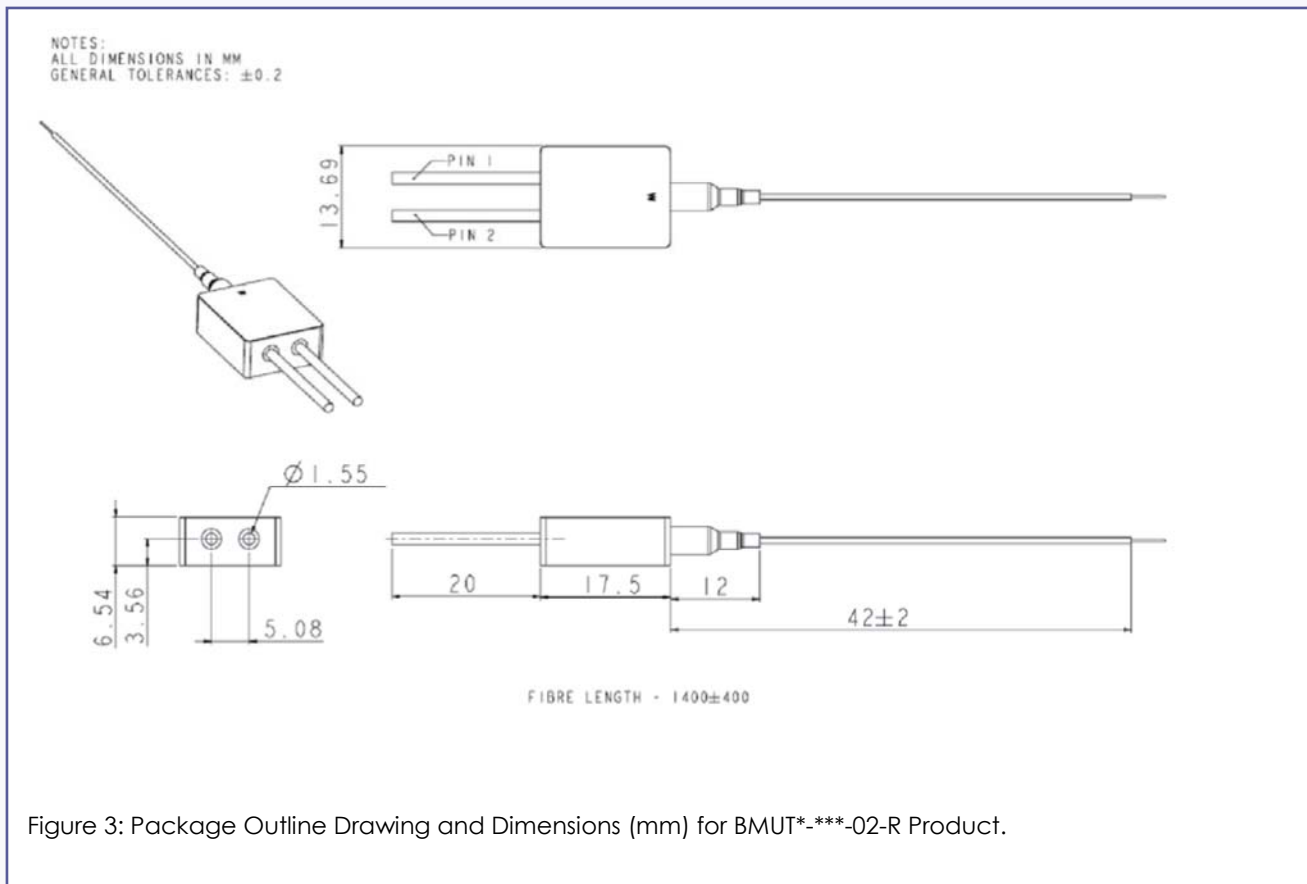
Package Outline Drawing and Dimensions (mm) for BMUT*-*-02-R Product.
